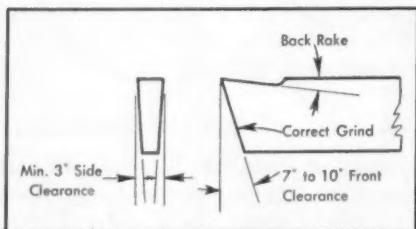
This sketch gives recommended angles for grinding a standard bevel cut-off blade.
